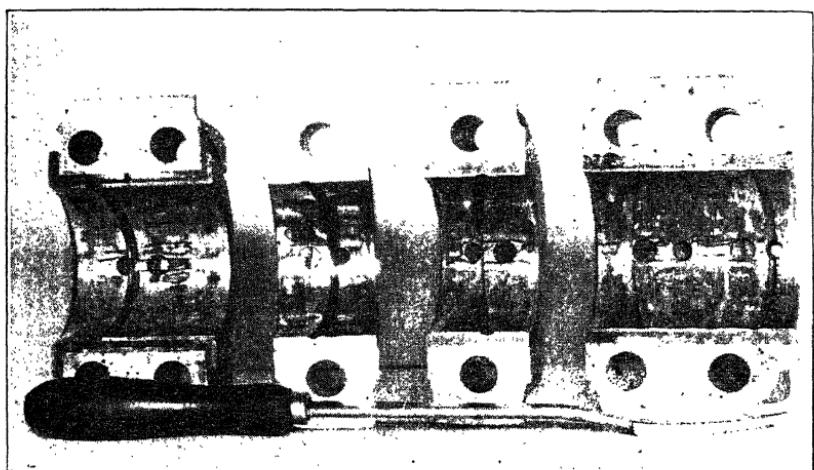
Set of Main-Bearing Caps with the "Impression" Off
